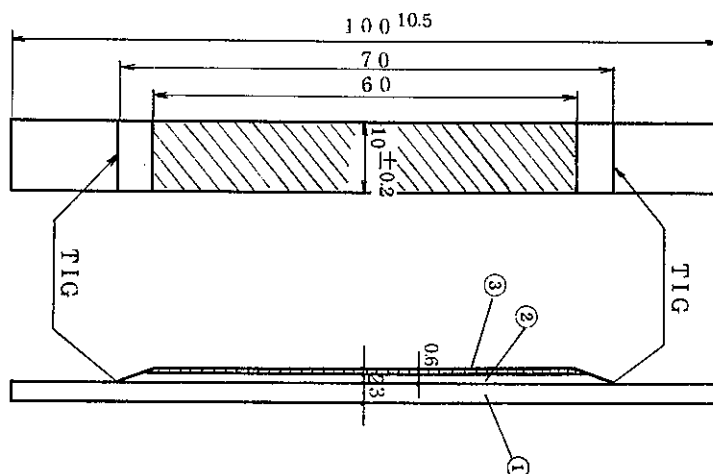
View of irradiated pad oblong shaped specimens(LC-1C).
